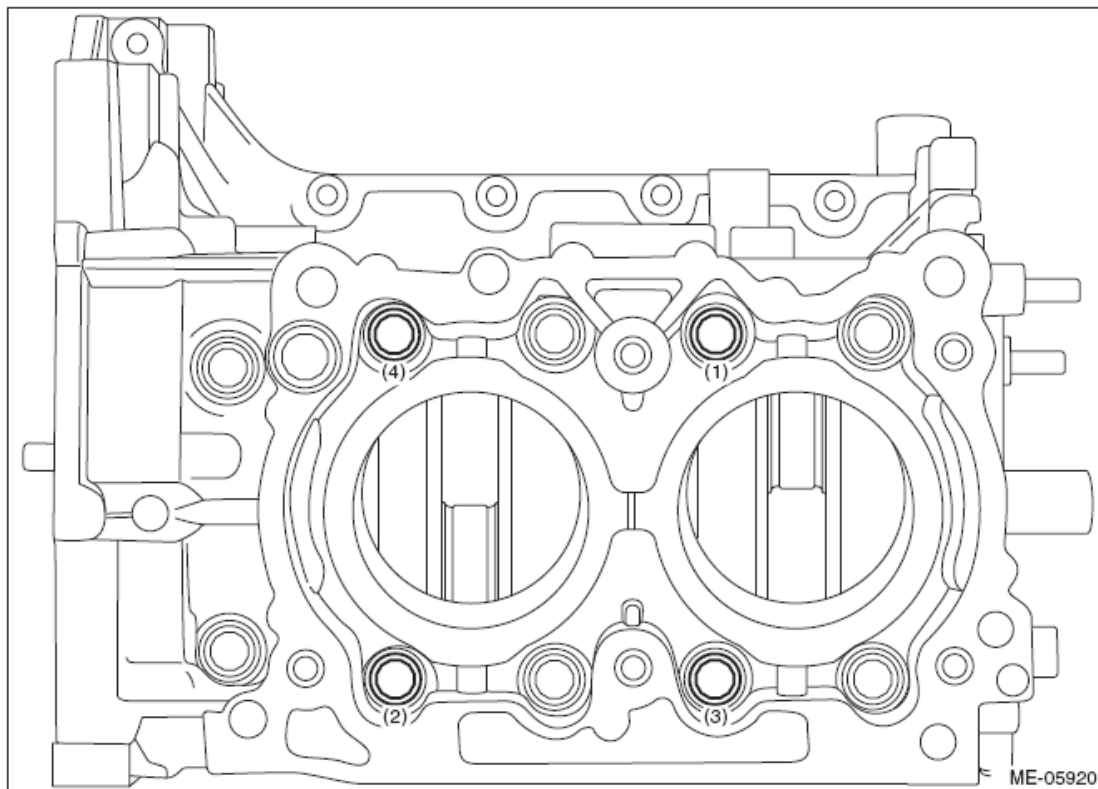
Identifying Cylinder Block Mounting Bolts Tightening Sequence
